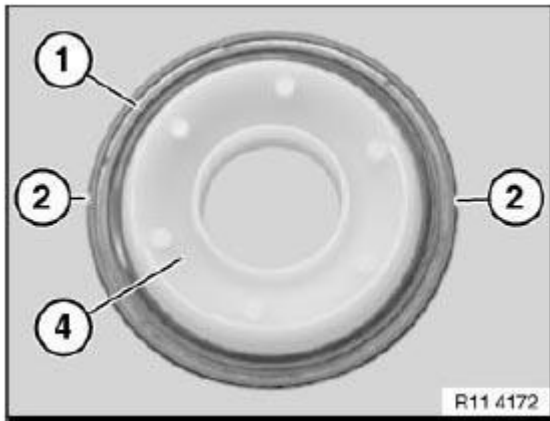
Bushing, Crankshaft Radial Seal And Grooves
